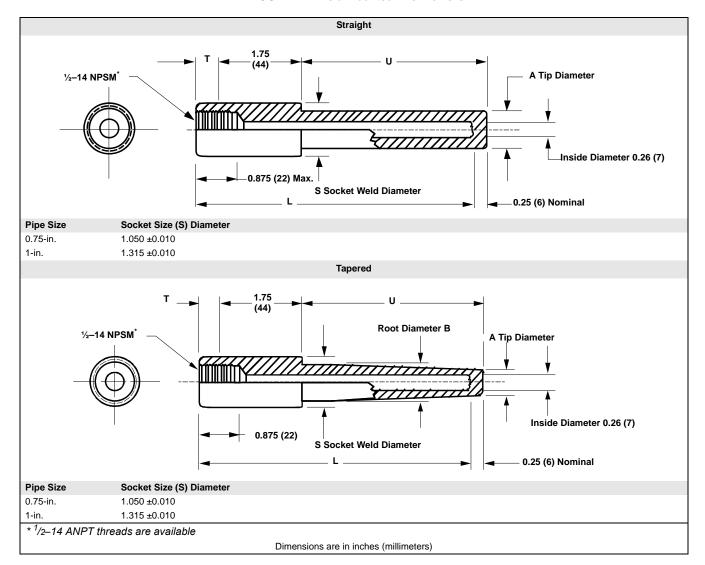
Weld Mounted Thermowells (continued)
